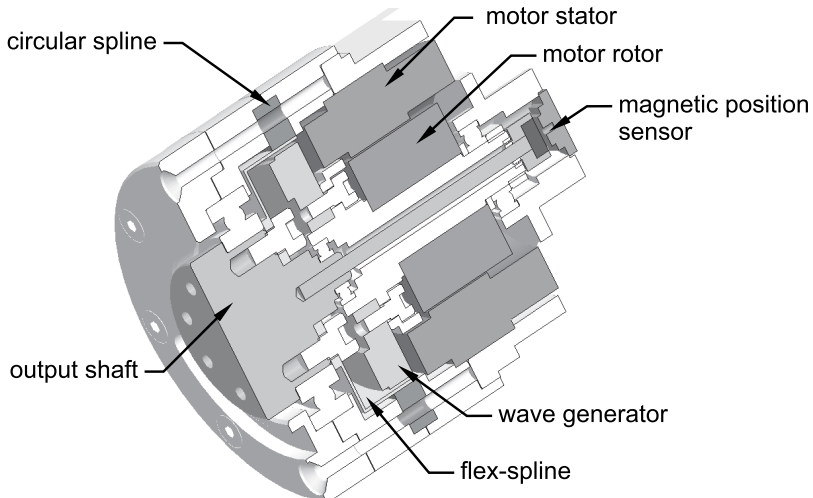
Motor group cross section. The figure shows a cross section of a iCub motor group. The harmonic drive and Kollmorgen brushless motor are clearly visible.
